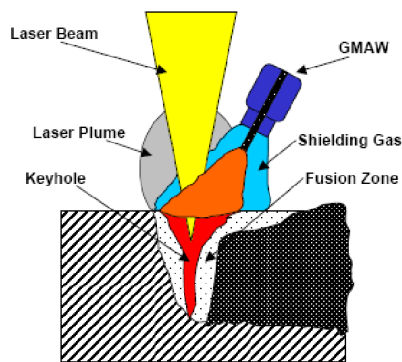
Schematic of the laser+MIG hybrid welding process
